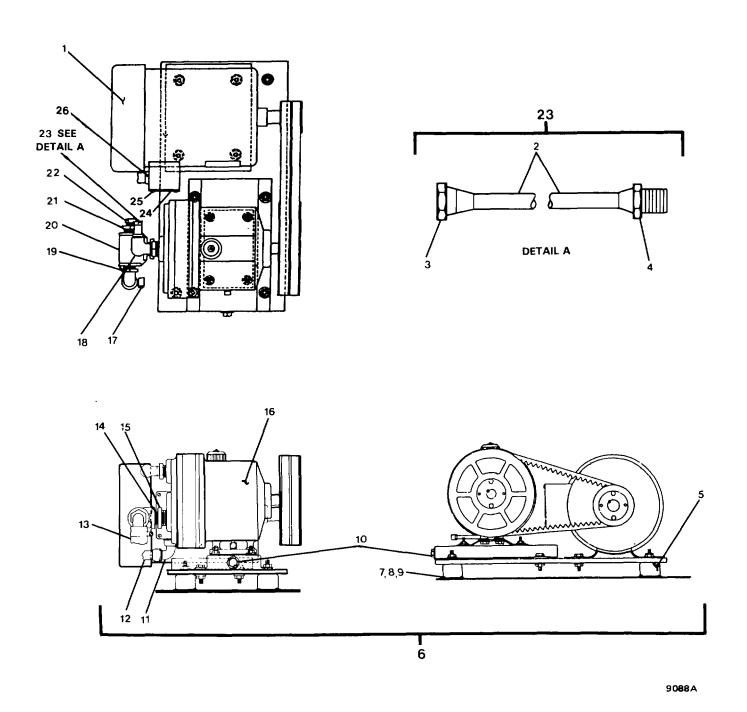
Motor and Pump Assembly Repair (Sheet 3 of 3).
